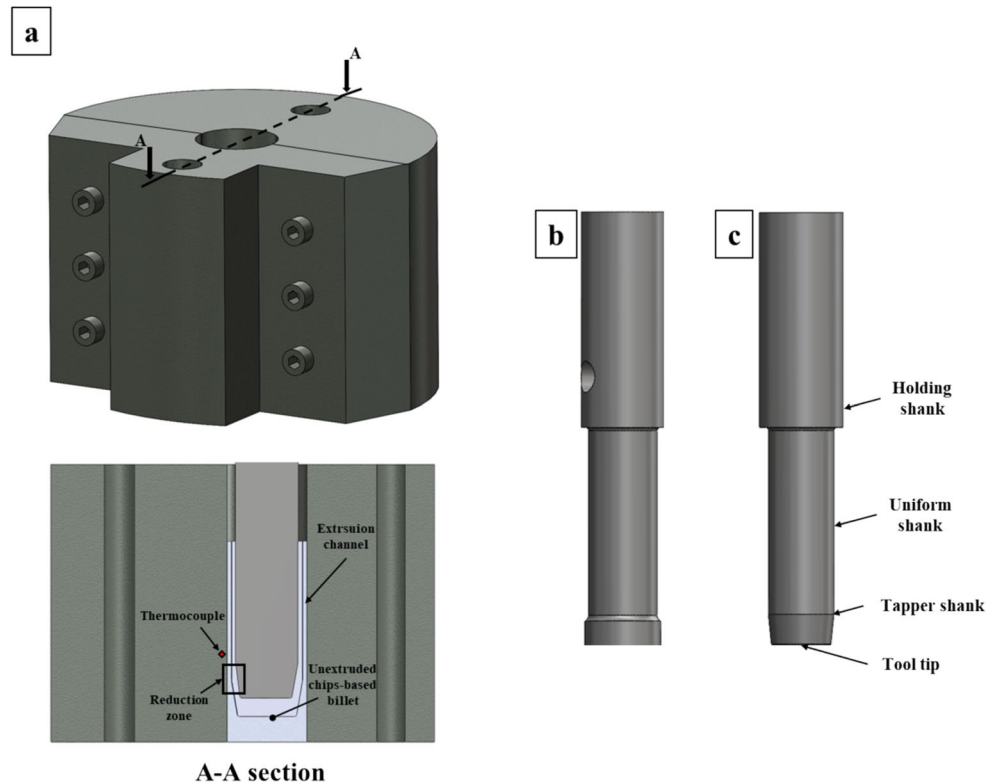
Sketches of the (a) designed die with section, (b) compacting tool, and (c) 20° tapered tool
